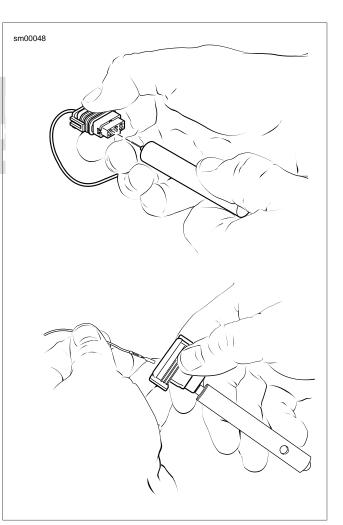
Delphi Micro-64 Sealed Connector: Insert Tool and Remove Terminal
